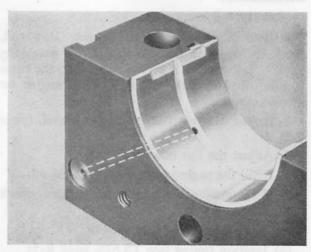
Front main bearing cap, showing the oilway for feeding the timing chain tensioner
